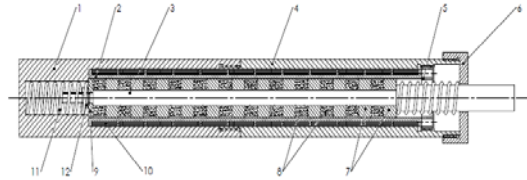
Manufacturing drawing (1 - lower case; 2 - coil support; 3 - piston shaft; 4 - upper case; 5 - Special nut; 6 - casing cover; 7 - iron pole; 8 - permanent magnet; 9 - washer; 10 - coil; 11 - spring; 12 - M4 nut.
